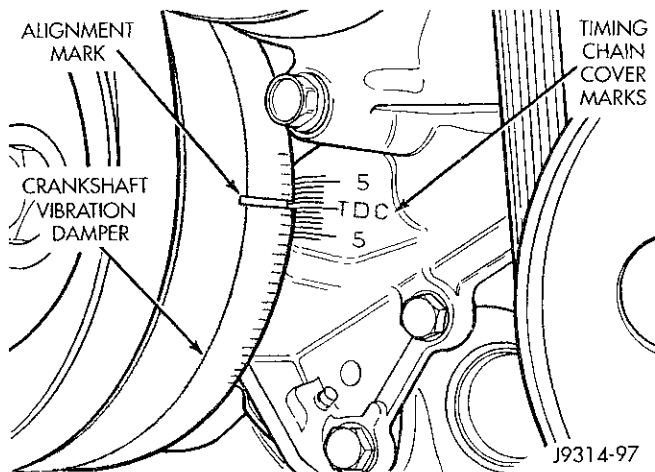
Damper-To-Cover Alignment Marks—Typical
